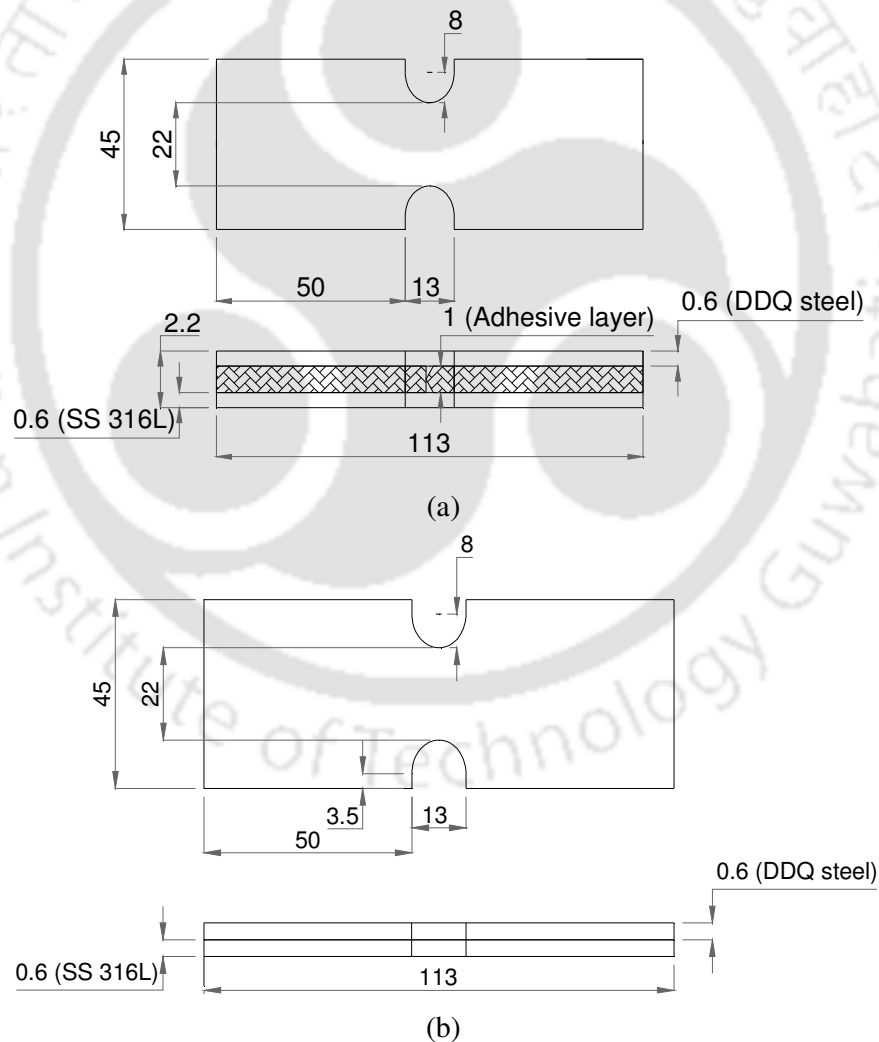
Geometry of in-plane plane-strain formability testing specimen (a) adhesive bonded sheets, and (b) double sheet; All dimensions in mm
